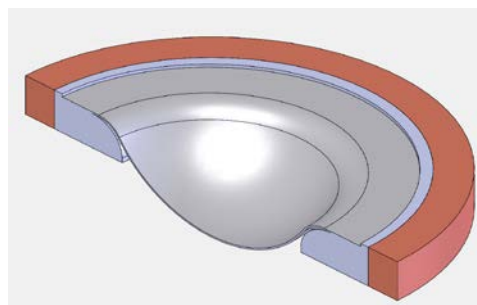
Cross-section of the window showing the bi-metallic construction of the ring
